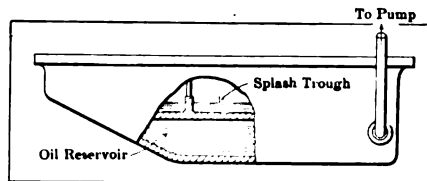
Illustrating the oil pan casting of the Bergdoll with the lead to the oil pump
